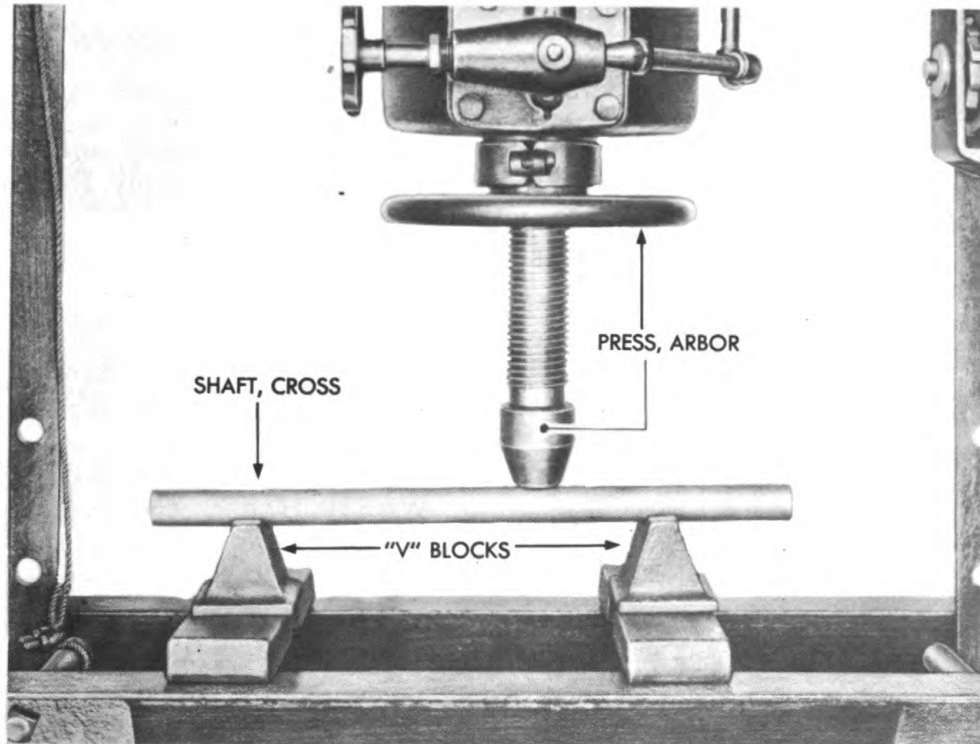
Straightening Sprung Cross Shaft RA PD 14936
